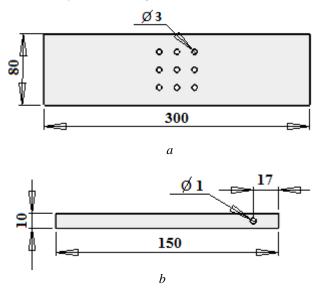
Specimens for fatigue tests: a – specimens for axial tension tests; b – specimens for bending tests
